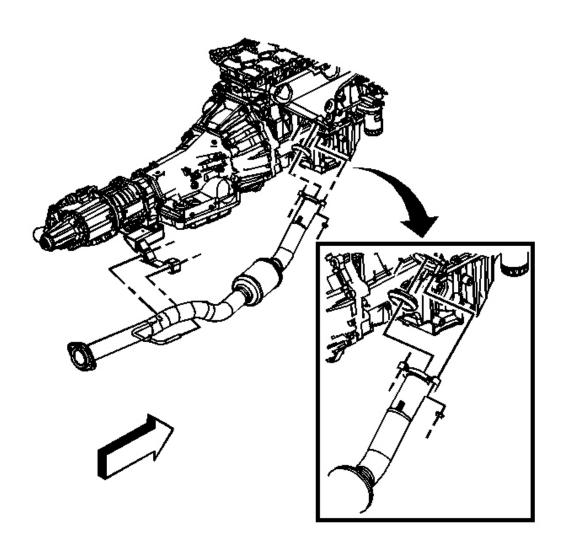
View Of Transmission Crossmember Support Courtesy of GENERAL MOTORS CORP.
